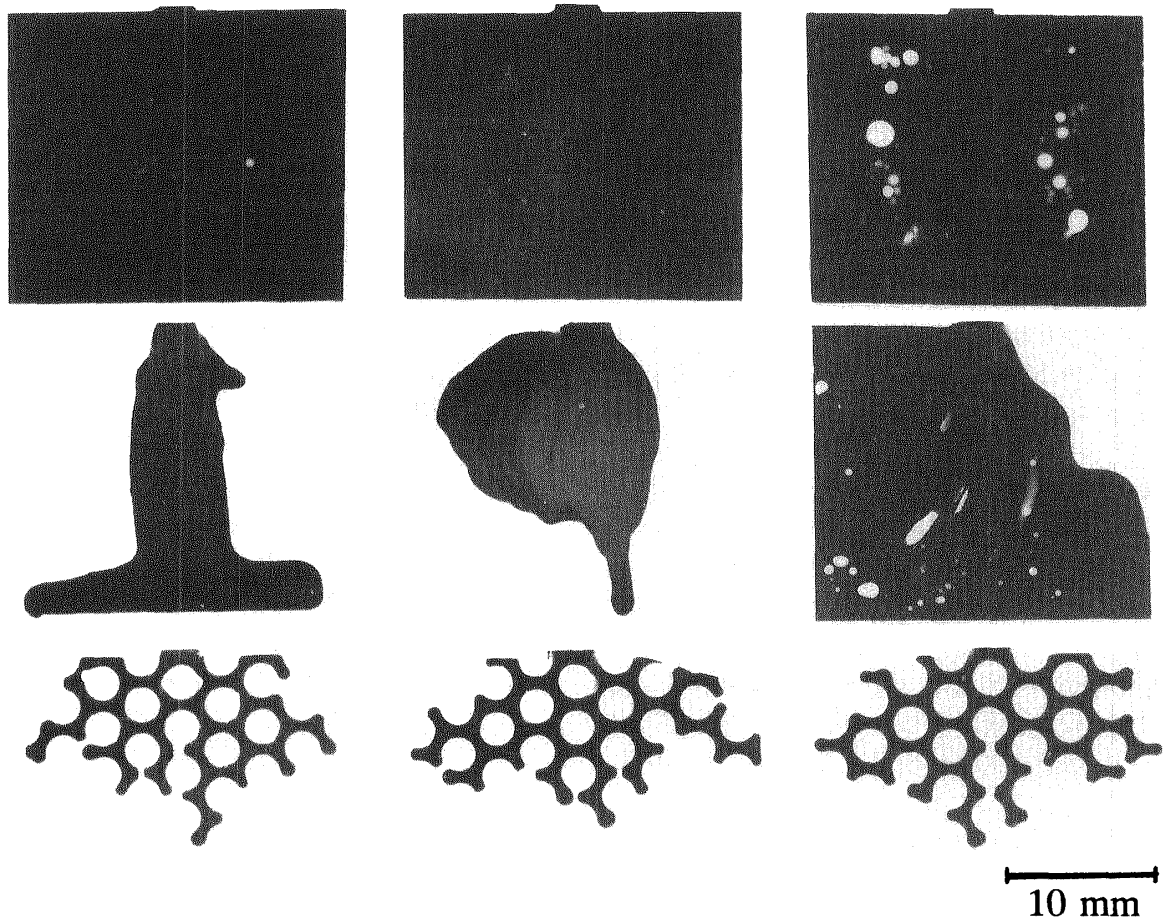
X-ray radiographs of three type castings of the titanium alloy ; thick plate castings (up), thin plate castings (middle) and grids castings (bottom)
